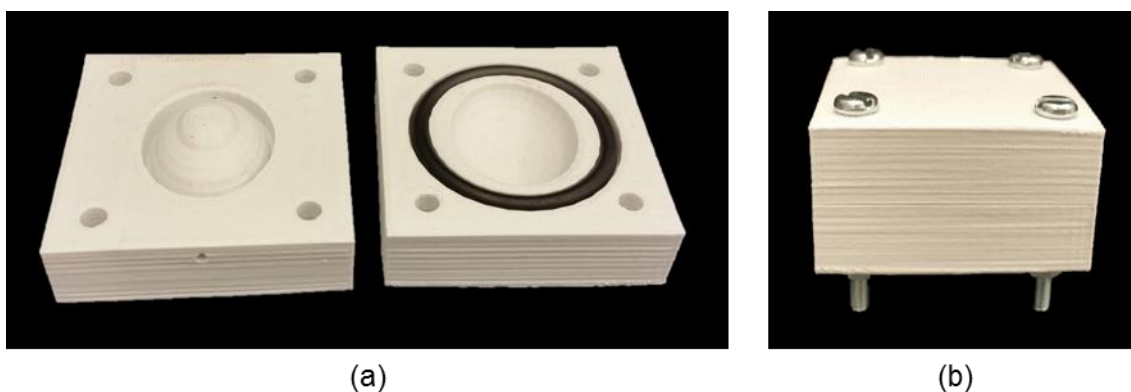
(a) 3D-printed lower (left hand side) and upper (right hand side) parts of the dissolution cell prototype with the rubber ring and without ridge or recess and (b) the successfully assembled prototype with bolts and nuts.
